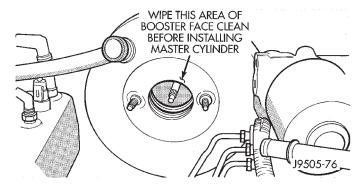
Cylinder Mounting Surface Of Brake Booster
